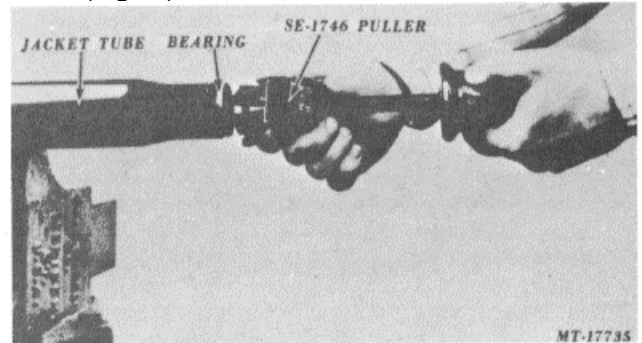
Remove Steering Jacket Tube Bearings Using Puller SE-1746
